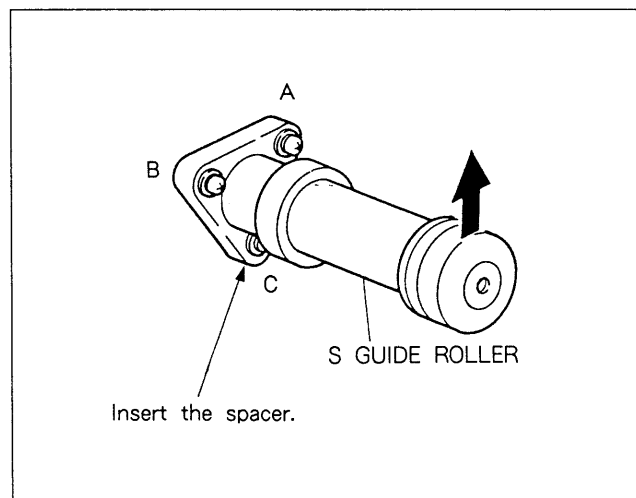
S Guide Roller Slantness Adjustment
